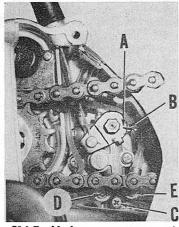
Marks on pump control arm pump body (A&B) should align at full throttle position.
